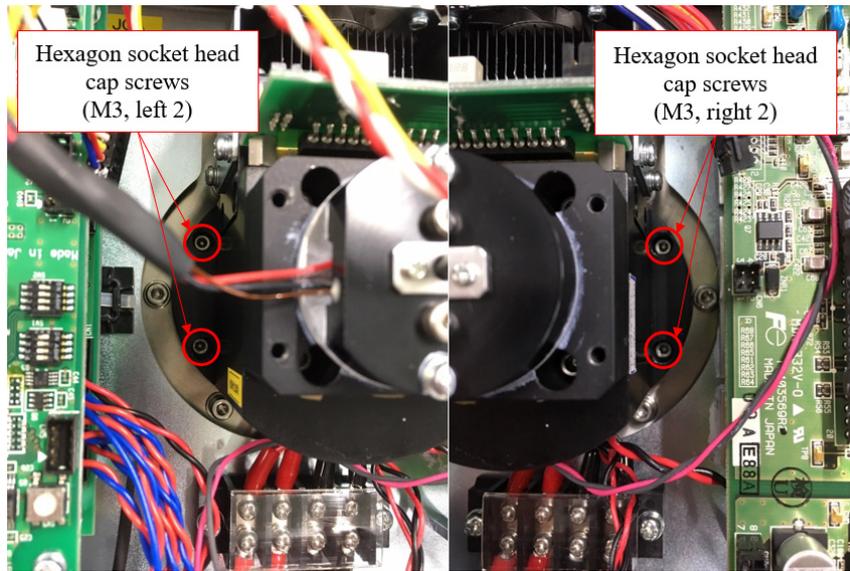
Hexagon socket head cap bolts (2 on the left and 2 on the right)
